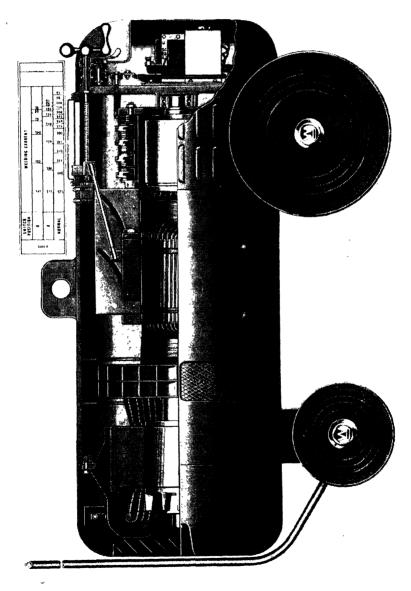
A cross section of a D.C. arc welder (Courtesy of: Westinghouse Electric and Mfg. Company)
